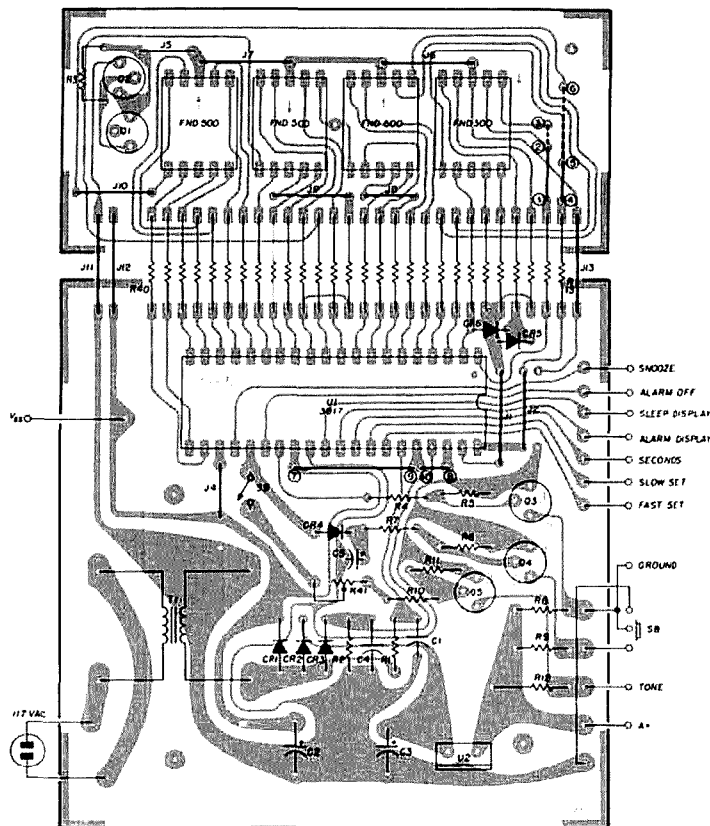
Component placement on the digital-clock PC board. A full-sized printed-circuit layout is shown in fig. 6.
